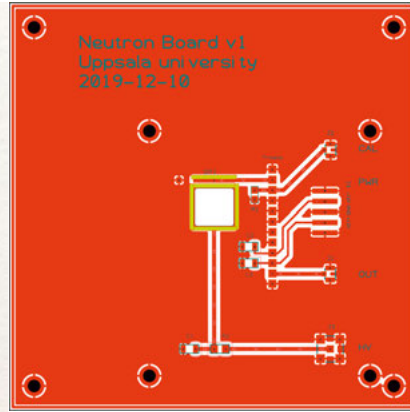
Phase-I read-out board. The board was designed by N. Binge-fors.
